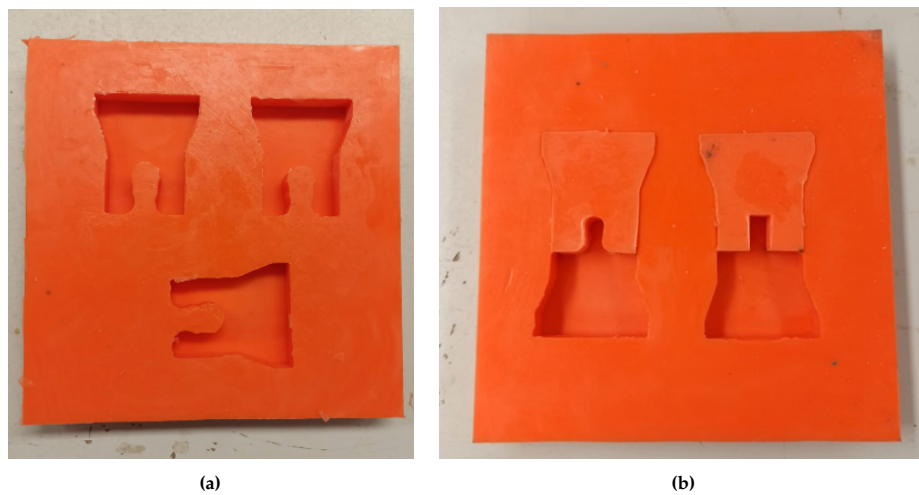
Silicon moulds for prefabricated keys: (a) top parts & (b) bottom parts
